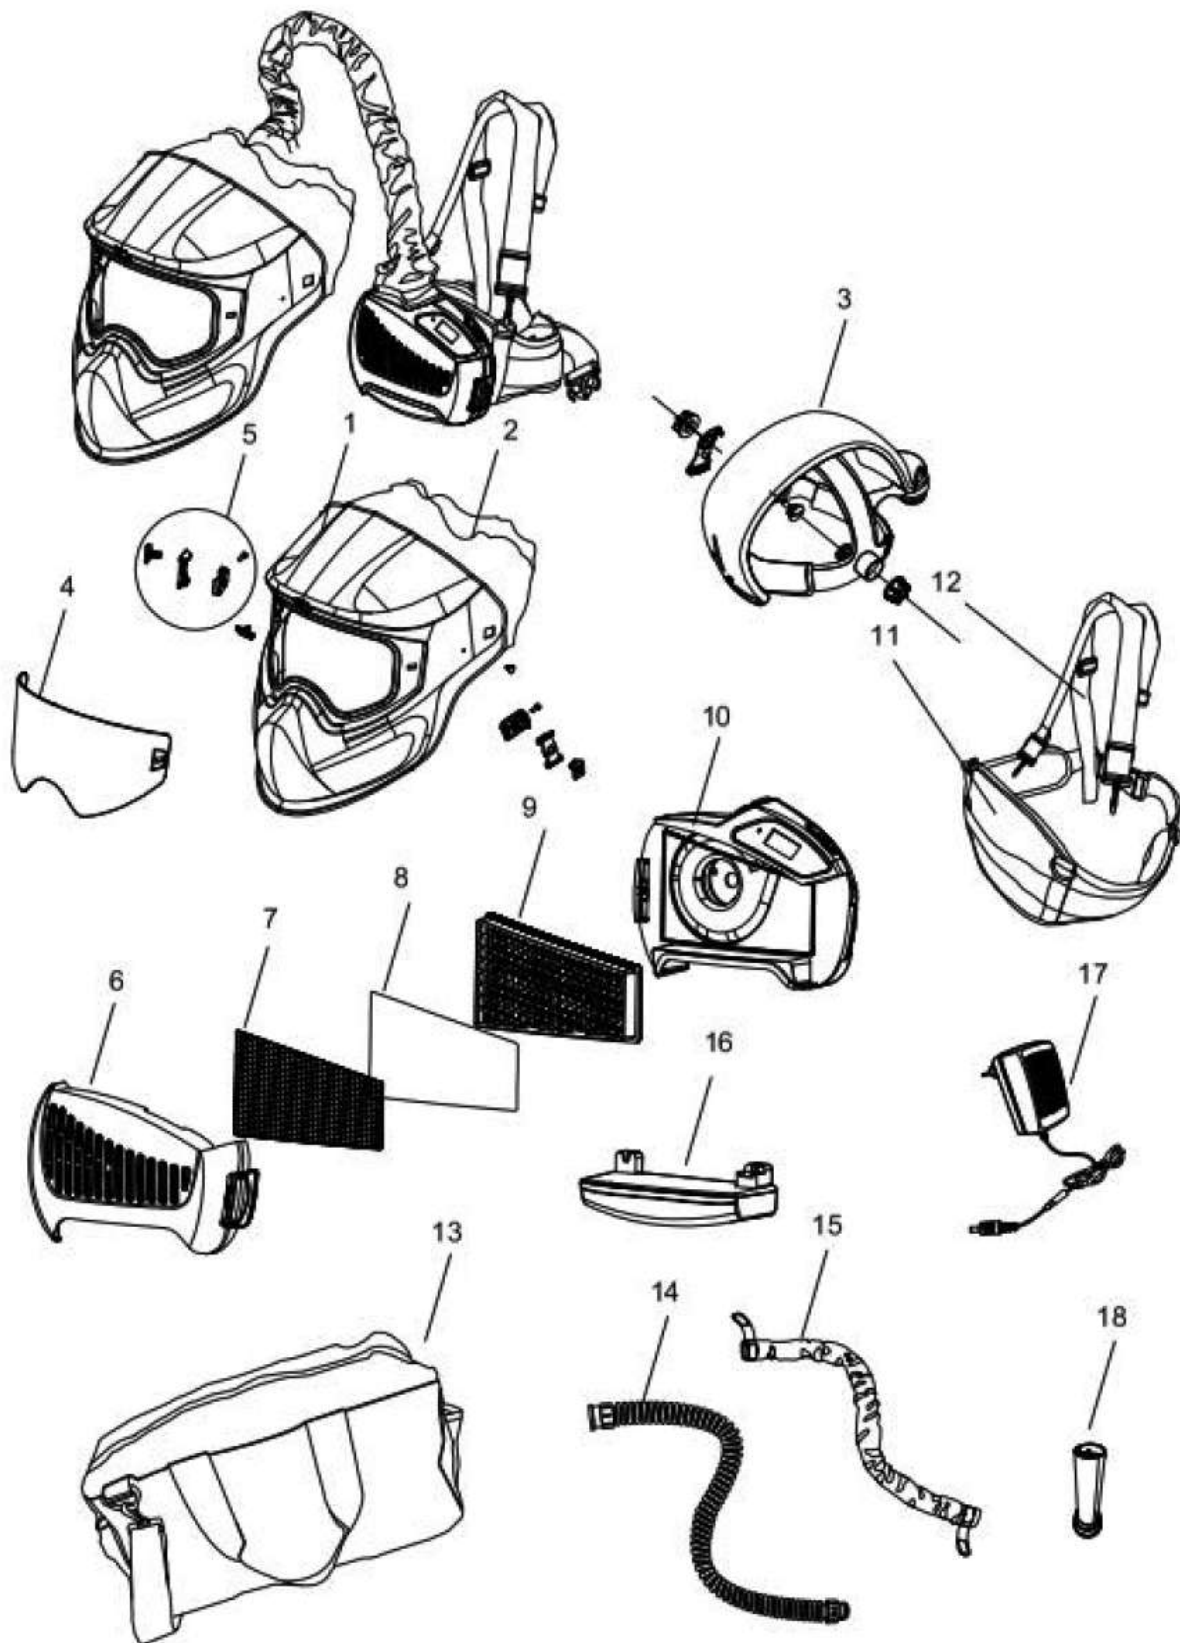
Spare parts drawing VarioProtect GRIND AIR
